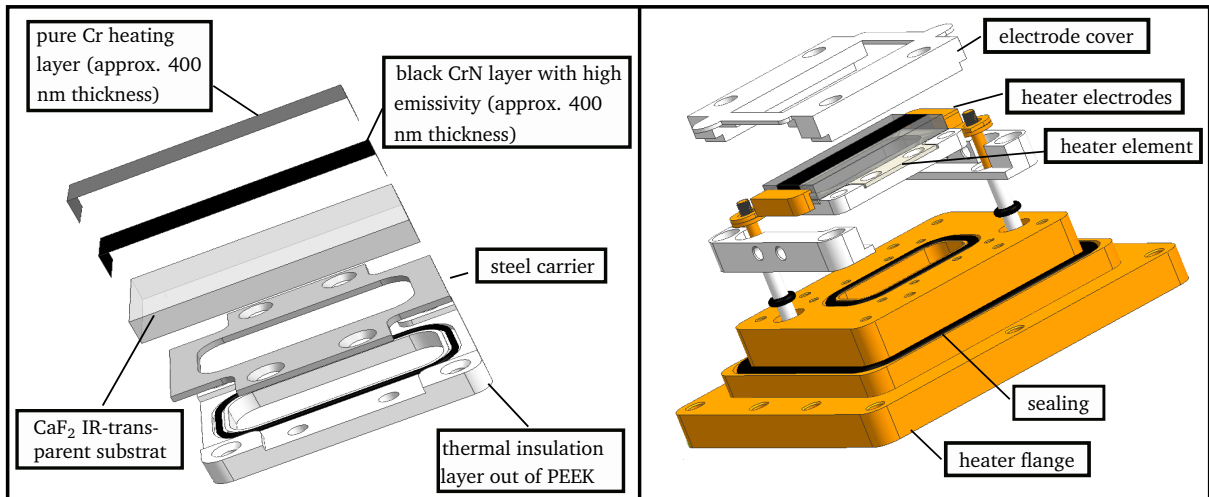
Exploded view of the heater design (left) and heater flange assembly (right).
